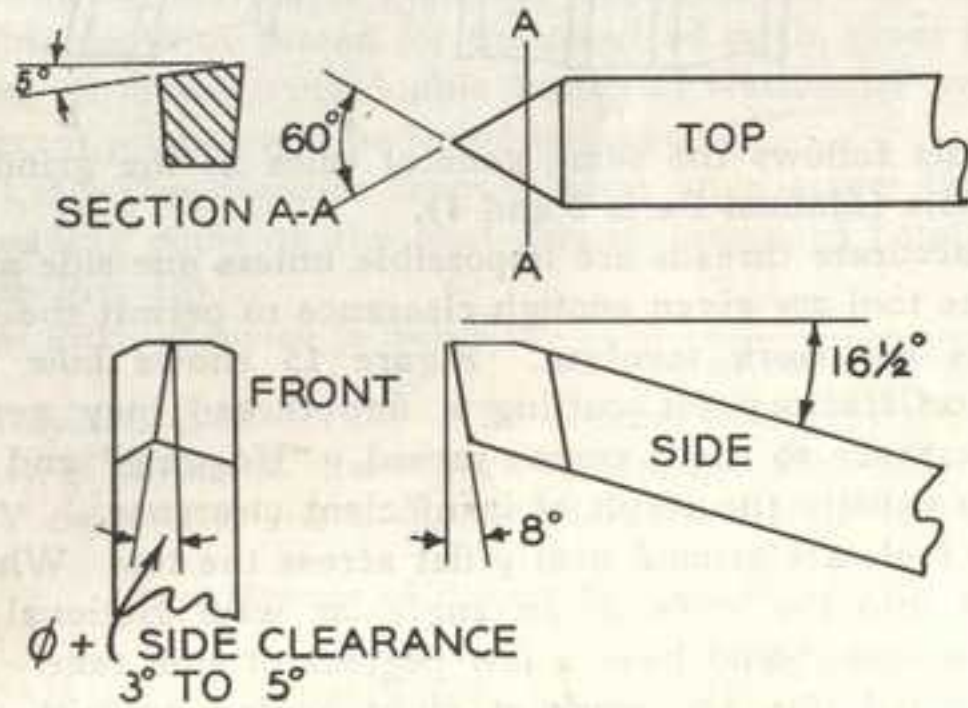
Tool for cutting 60° type threads. Fig. 40 explains how angle ϕ must be determined.
